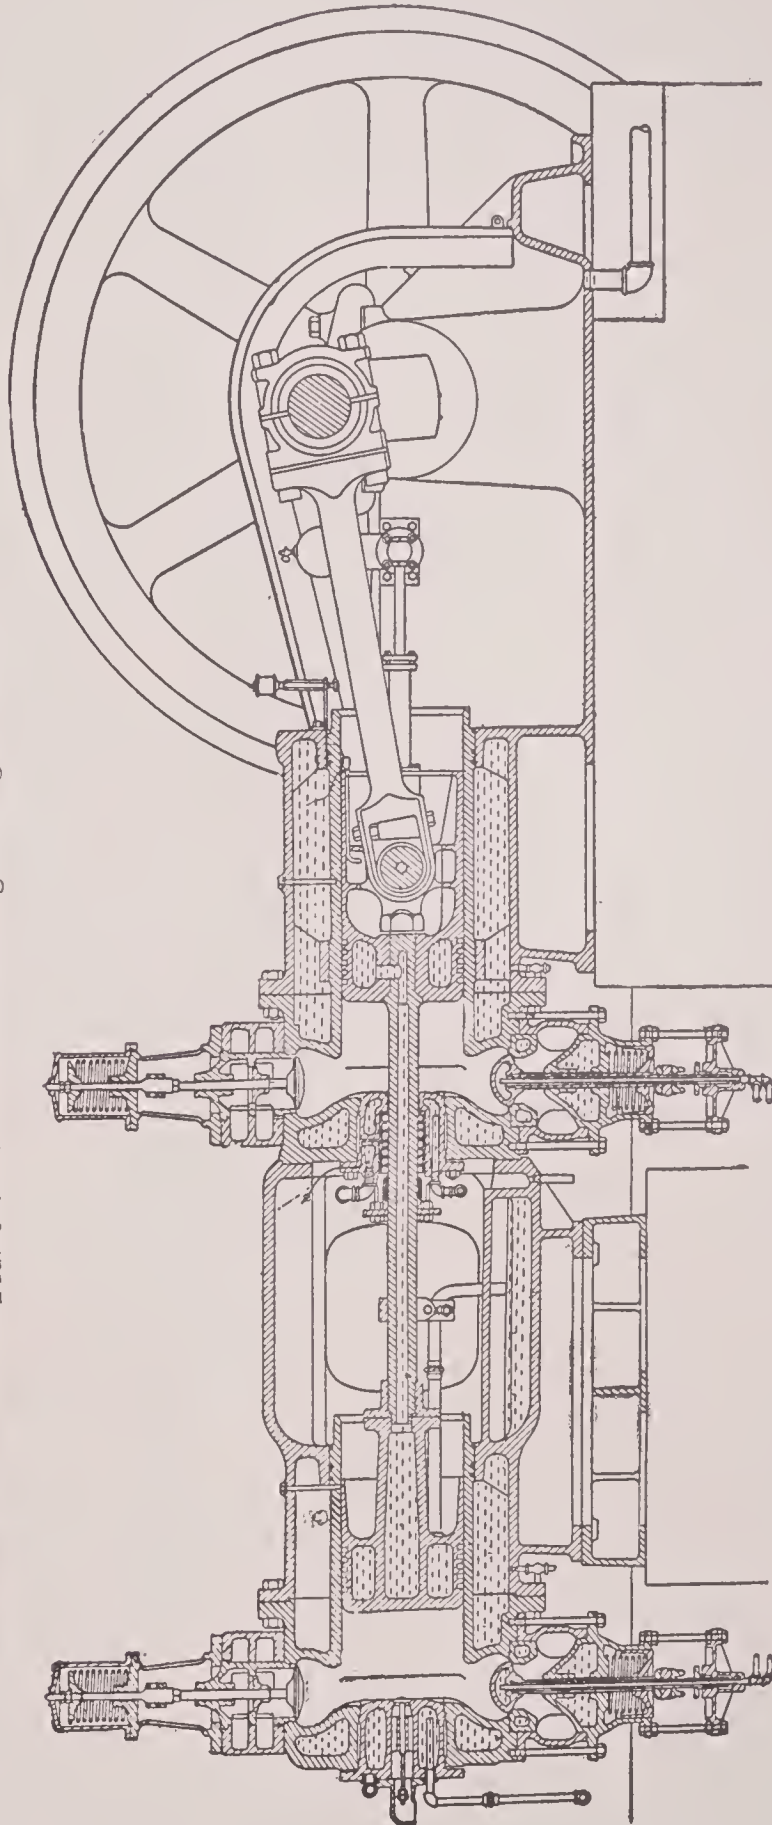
Cross-section, Single-acting Tandem Engine.
